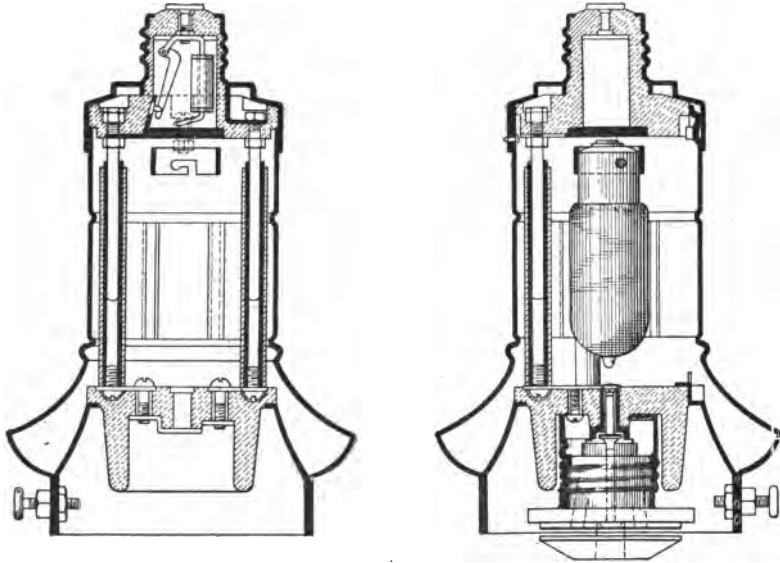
Sectional Views of Single-Glower Westinghouse Nernst Lamp.
